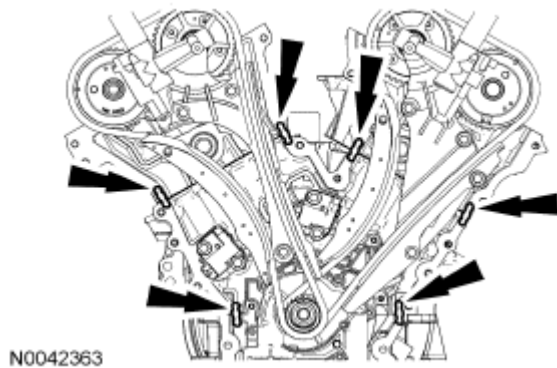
Locating Silicone Gasket And Sealant On Cylinder Block
